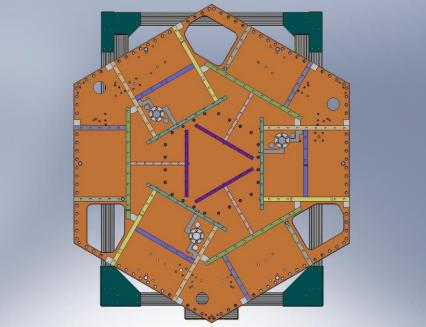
Use a wrench extension to torque the Keel Wall mounting screws.
